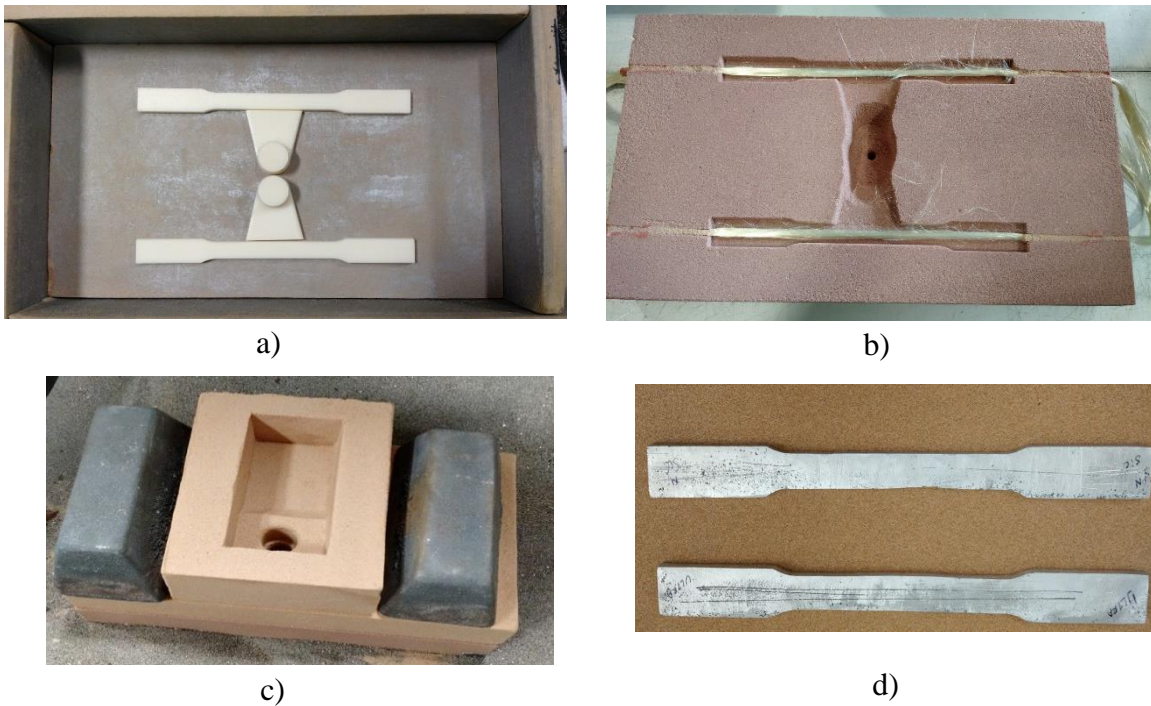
Tensile test specimens a) patterns b) fibers c) mold d) cast and machined part
